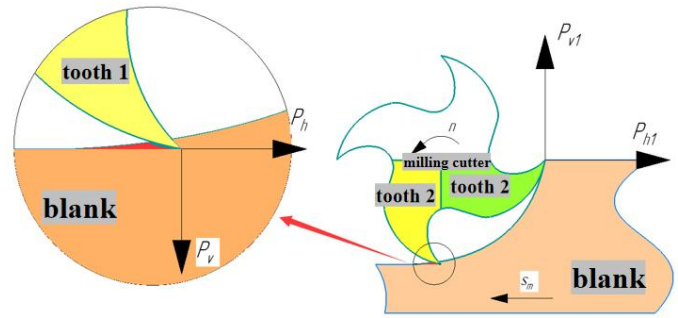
The components of the forces acting on the part during up-cut milling when plunging with a sharp cutter
